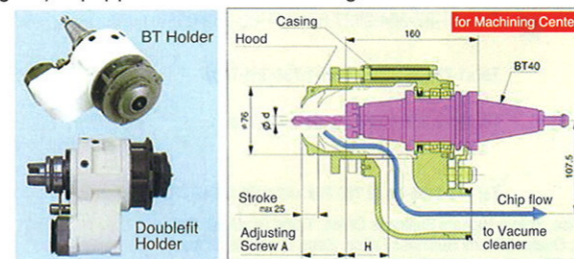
Chip vacuuming holder for drilling hole (PAT.)
